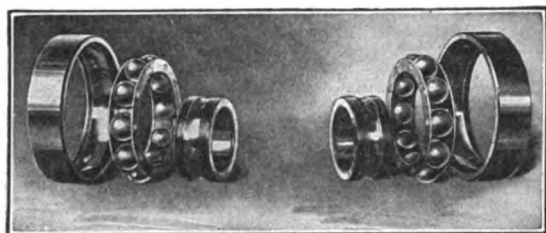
TWO "NORMA" BALL BEARINGS IN POSITION AS USUALLY MOUNTED
